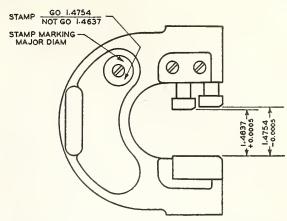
Adjustable plain snap gage (American Gage Design Standard, model C) for checking screw. threads of Truncated Whitworth form; nominal diameter 1½ inches; 6 threads per inch; class 2 tolerance.
